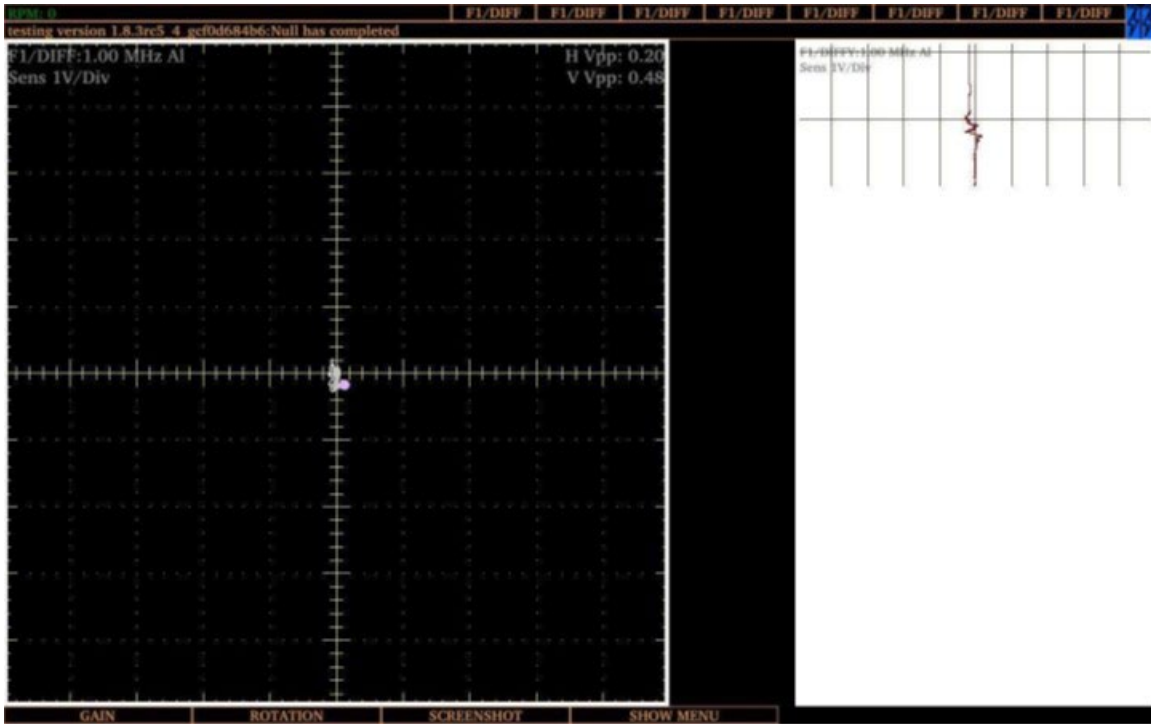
ET indication of defect at Location 2 in butt weld test panel MG-16
